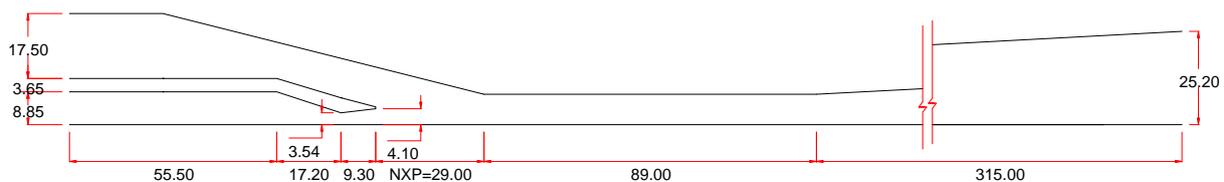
A scheme of the ejector including dimensions (All dimensions are in millimeter. The drawing is not scaled)
